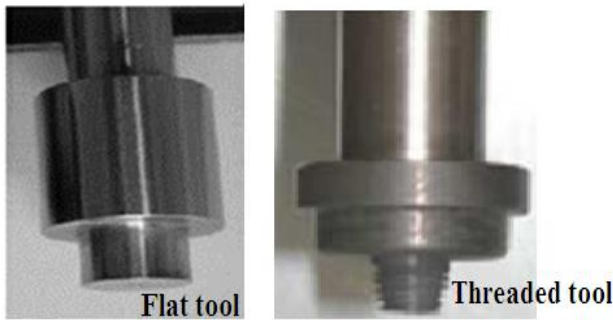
High Carbon (H-13) tools used during friction stir processing.
